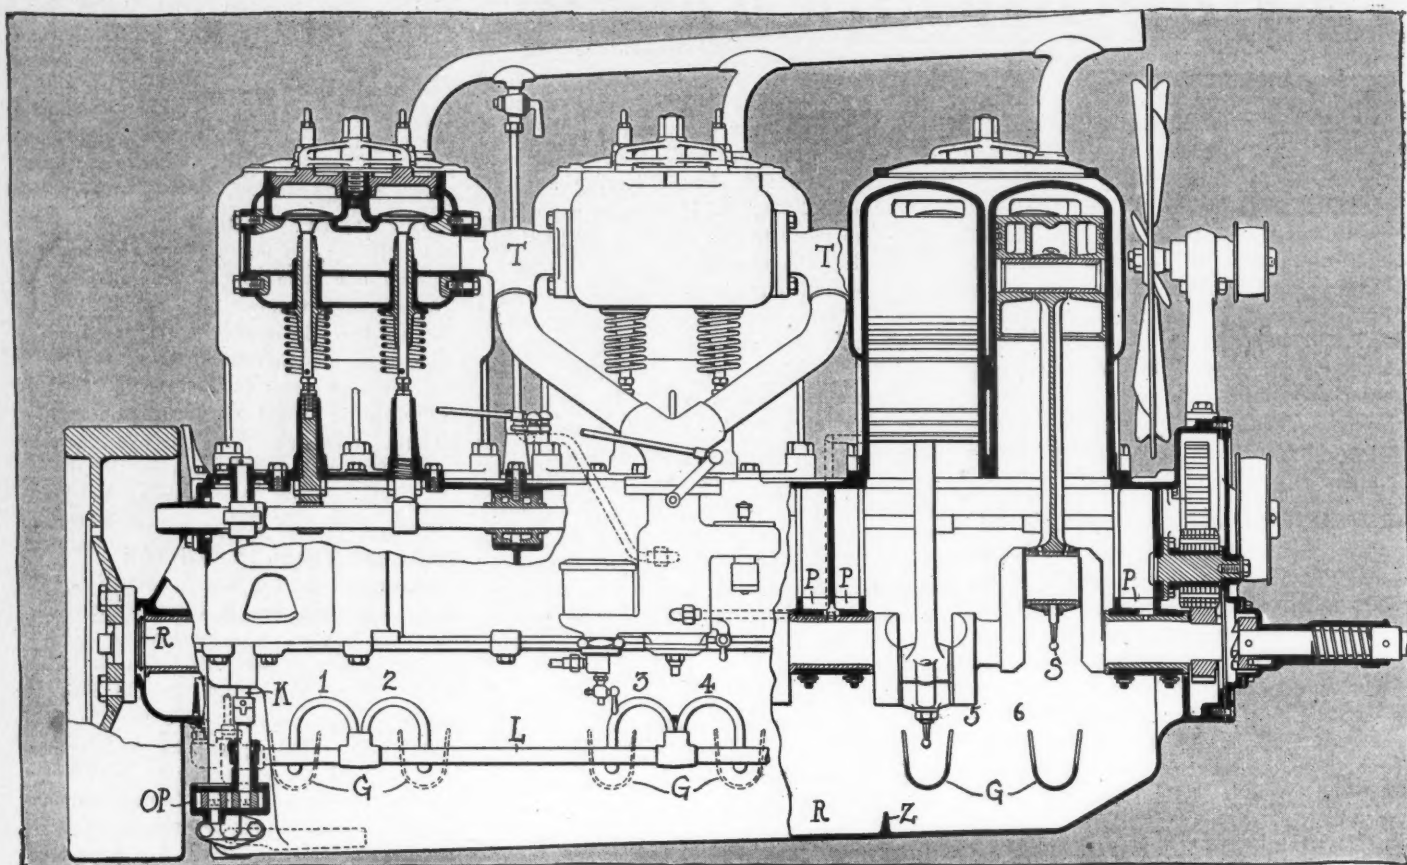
SIDE ELEVATION AND SECTION OF 1911 SIX-CYLINDER PREMIER MOTOR SHOWING THE NEW CIRCULATING OILING SYSTEM THAT IS USED
